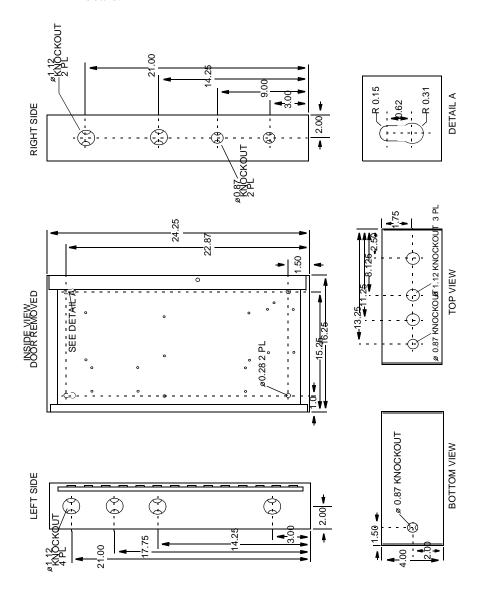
gives the dimensions for mounting the apC/8X cabinet with board.
